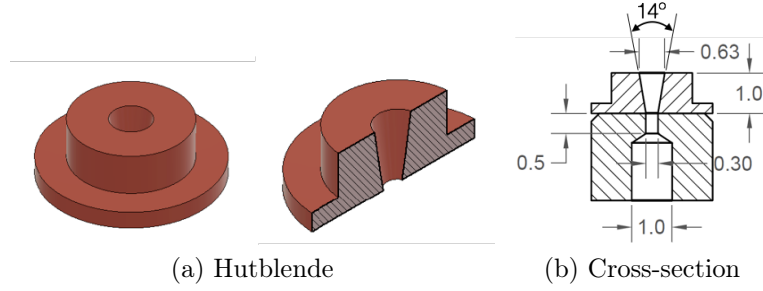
(a) 3D view of the transonic nozzle along with its cross-section, and (b) its important dimensions along with part of the inner housing's flow section.
